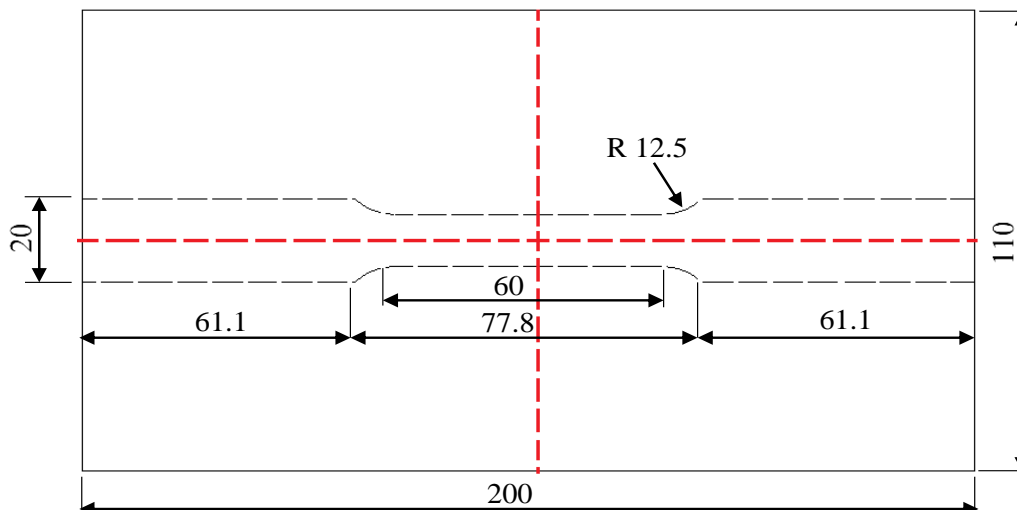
The dimension of the AISI 304 Steel sheet and cut out the block for tensile tests
